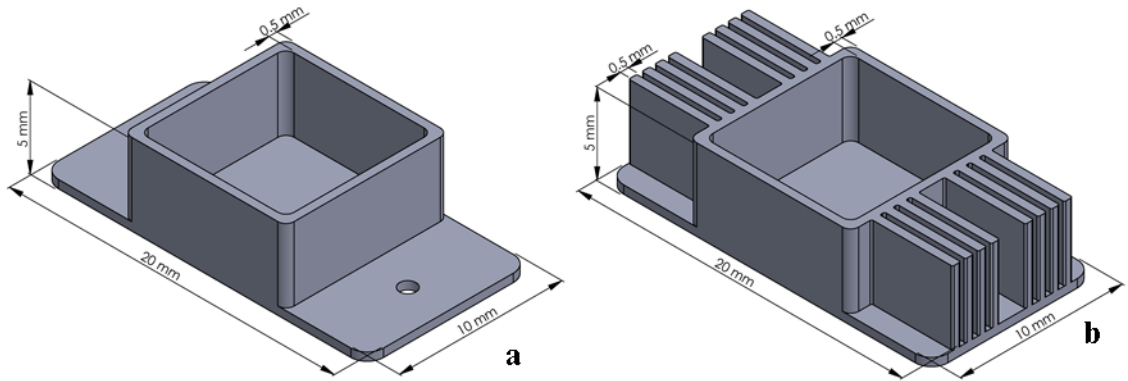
Mold geometry used in injection molding simulations: a) simple heat-sink substrate without fins, and b) heat sink substrate with fins.
